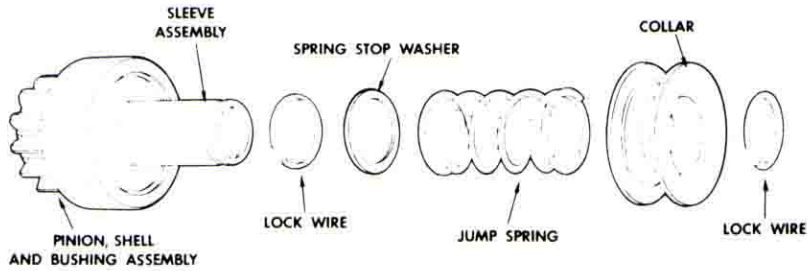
Disassembled view of early type intermediate duty sprag clutch drive assembly.
